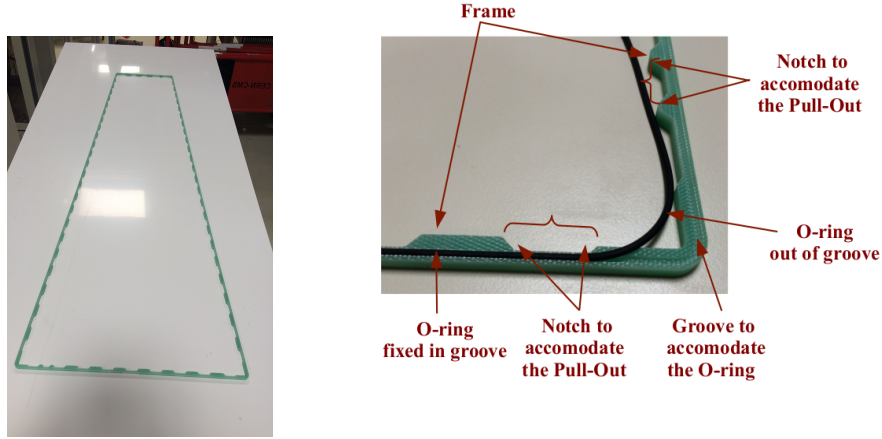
(left) The GE1/1 epoxy-glass external frame. (right) Close-up view of the section of the external frame showing the groove in the frame, O-ring in and out of the groove and notches in the inner side of the frame to accommodate the pull-outs [17].
